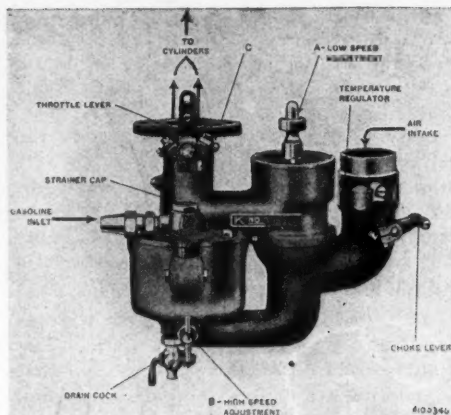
Stromberg carburetor model K1, showing points of adjustment
